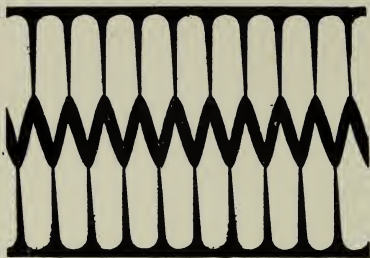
Steel strip from which a number of pen-blanks have been cut.
